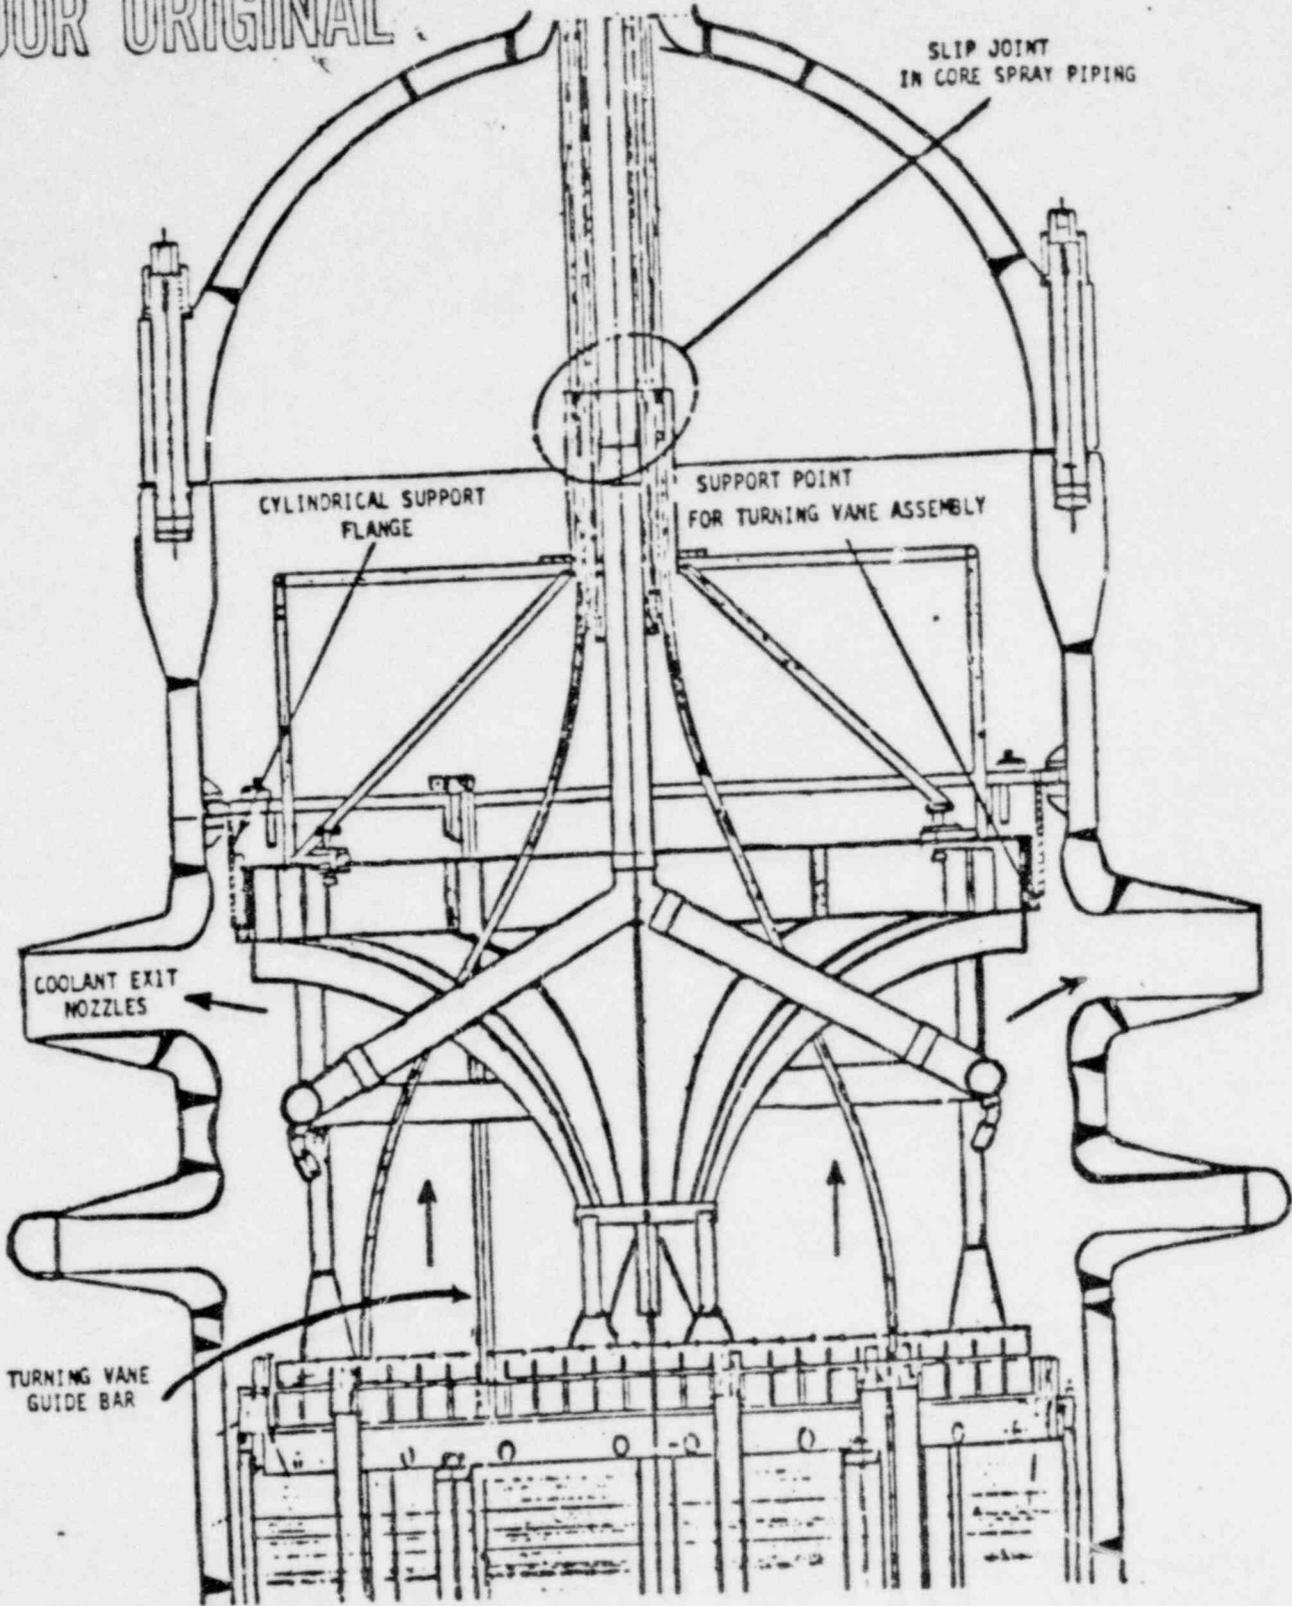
TURNING VANE ASSEMBLY INSTALLED IN THE PRESSURE VESSEL.
